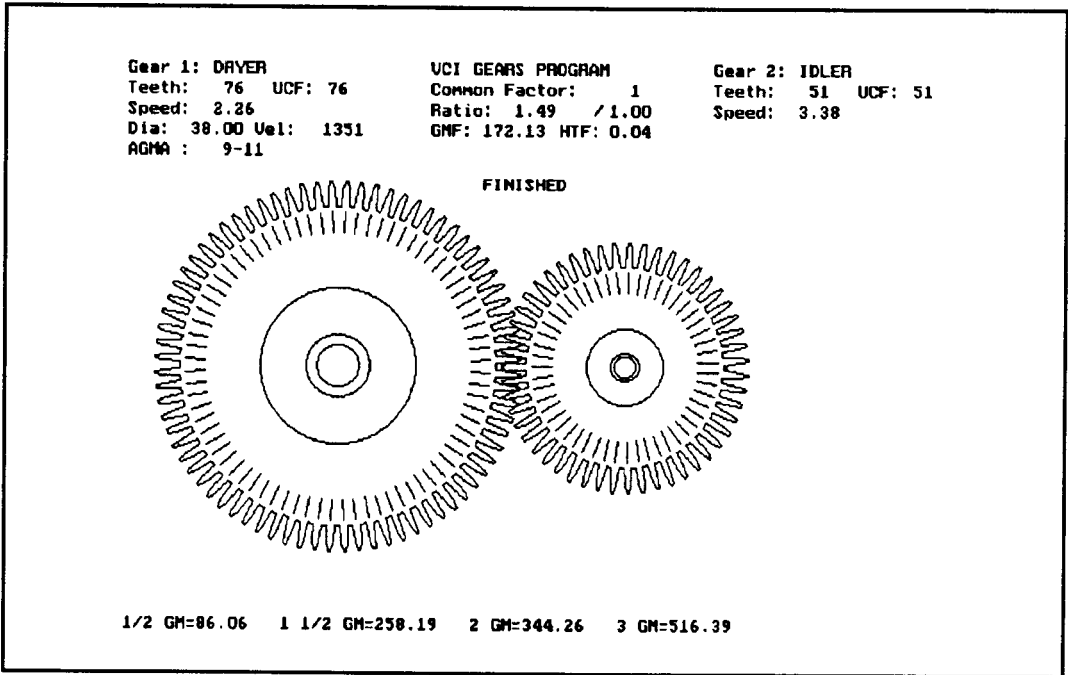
Gears Program Output for Dryer and Idler Gear.
